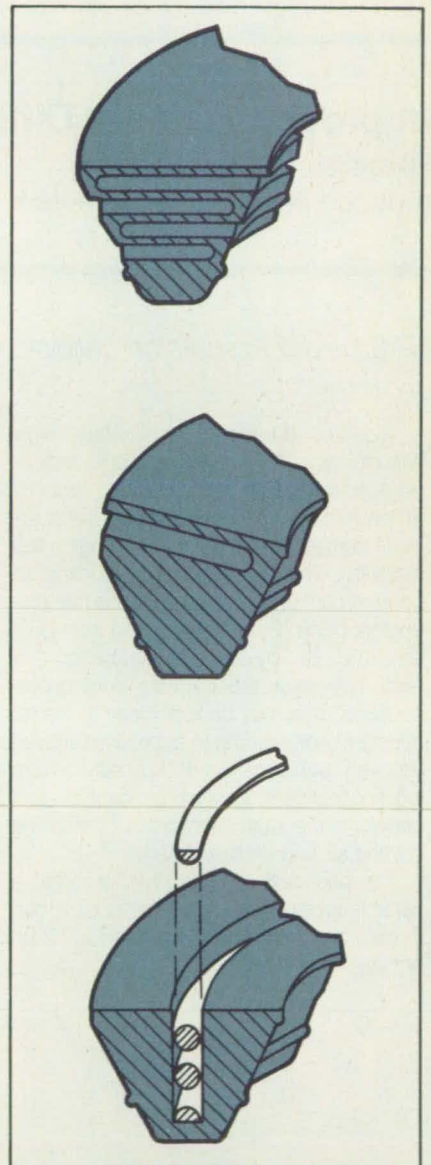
These Springs for the Ring Wedge may be used instead of the Belleville spring washer of Figure 1.
